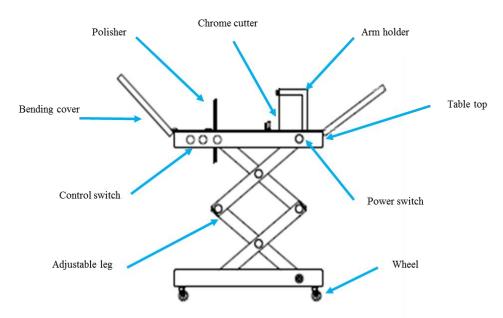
Conceptual design sketch of semi-automatic acrylic cutter and bending machine
